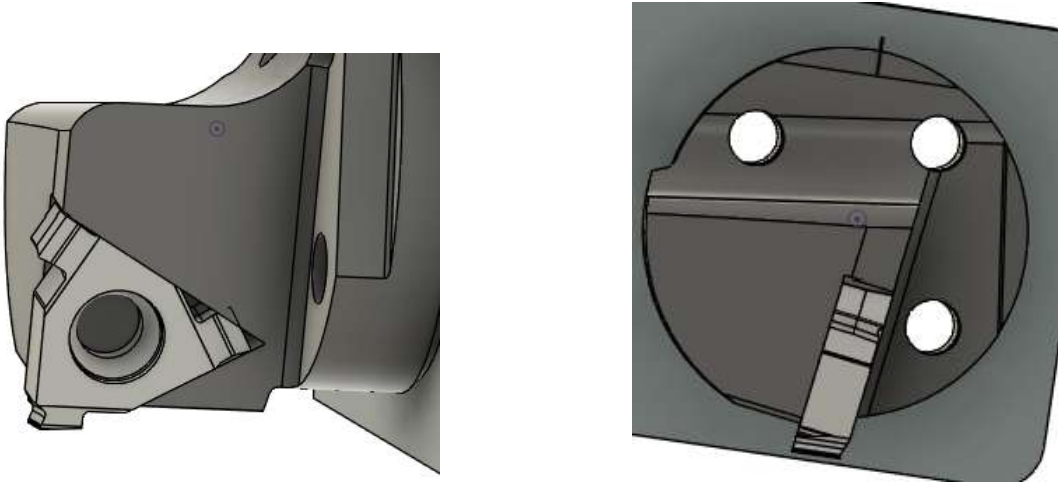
Images from Autodesk Fusion showing how the cutting insert is positioned on the tool holder.
